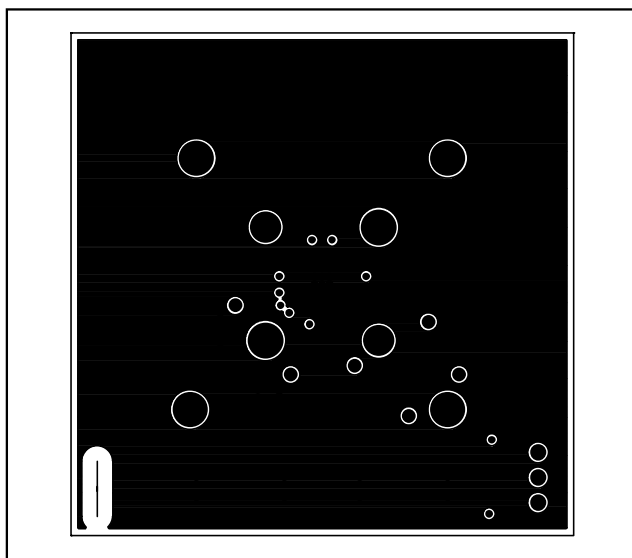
MAX3801 EV Kit PC Board Layout—Ground Plane
